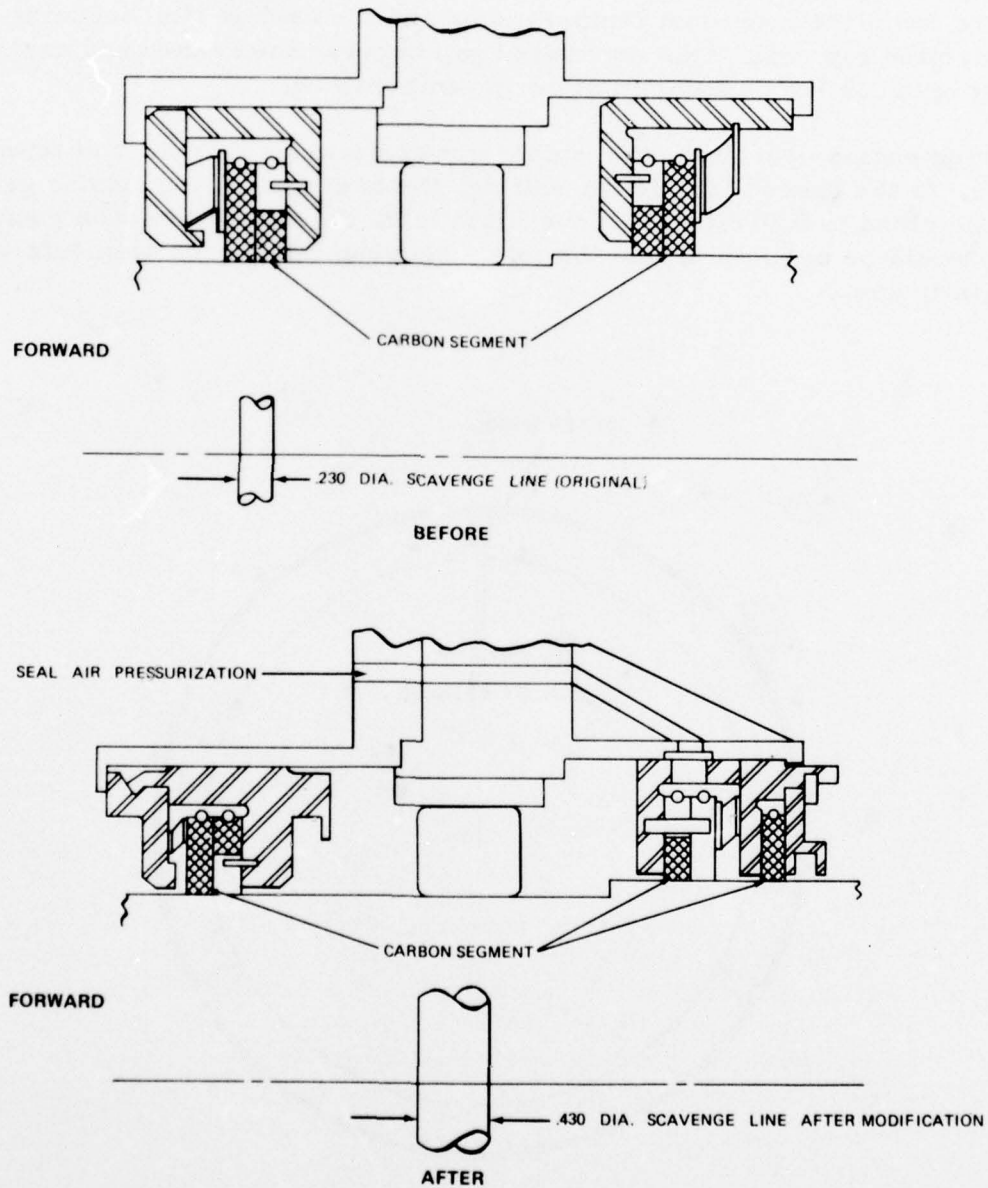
T53-L-13 Number 2 Bearing Package Schematic
